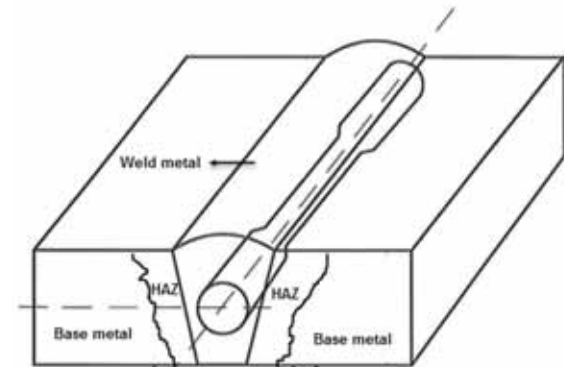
Schematic view of tensile test samples taken from all weld metal
